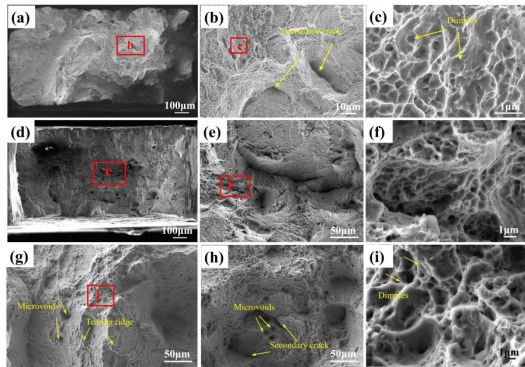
The tensile fracture morphology of TA15-0.1Y₂O₃ alloy at 500 °C: (a-c) As-built; (d-f) 600°C annealing; (g-h) 900°C annealing.
